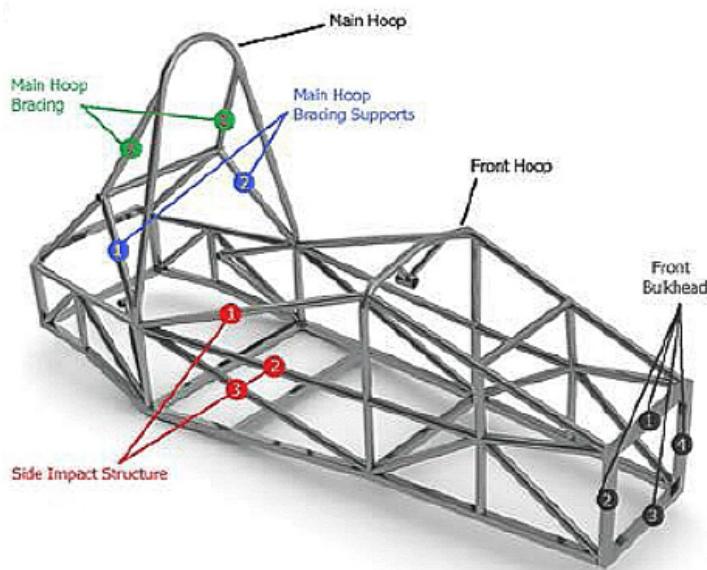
Steel Tube Space-Frame Chassis [26]
